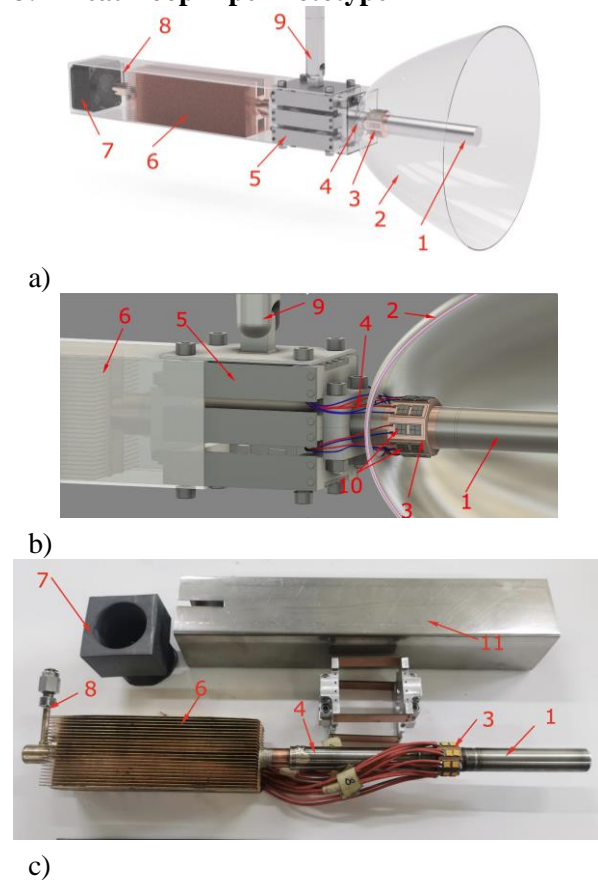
Design of HLP light. a) HLP design; b) Detailed view of EV; c) Photo of manufactured HLP without drivers & Reflector. 1 – CC and Handle for positioning; 2 – Parabolic Reflector; 3 – EV; 4 – Adiabatic Transport Zone; 5 – PCB drivers for LEDs; 6 – Air cooled finned CD; 7 – Fan; 8 – Charging Port; 9 – Support articulating arm 10 – multiple LEDs (18 units in total); 11 – Condenser envelope/ air duct.
